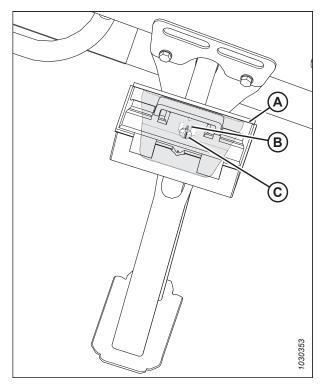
Toolbox Mounted on Jack Stand Bracket
